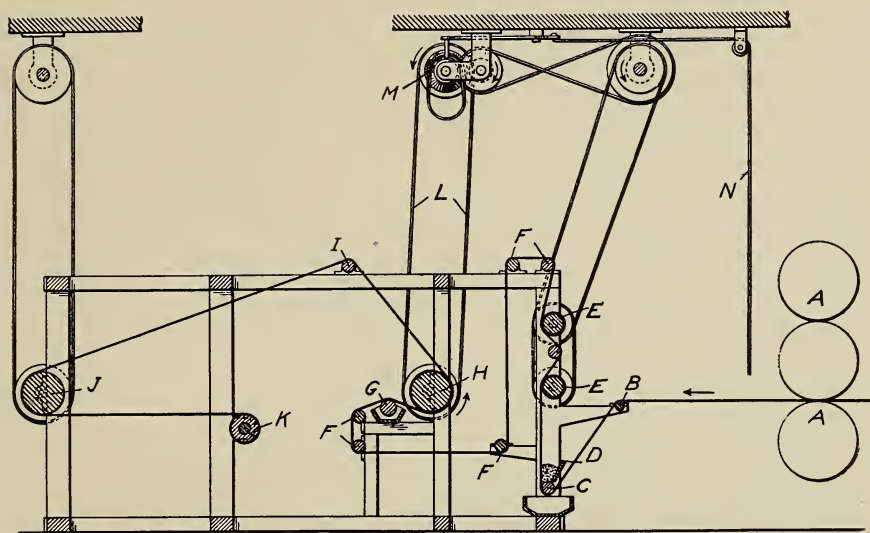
THE HODGMAN DULL-FINISH MACHINE.
